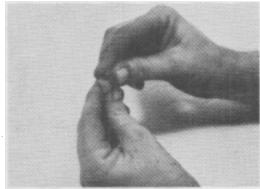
Squeeze filter to spread oil and re-install in carburetor cover.
